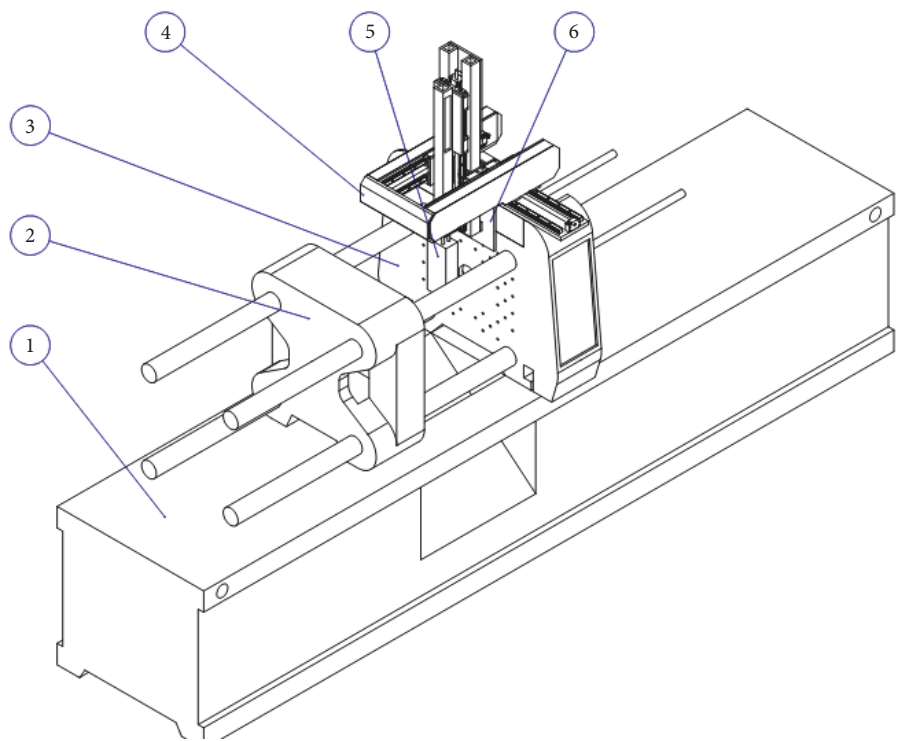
General process of gas-assisted mold surface heating in injection molding [17].
